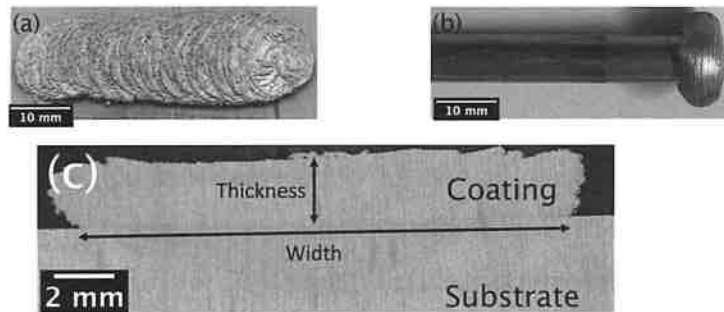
(a) FS coating, (b) consumable rod, and (c) cross-sectional view of the coating
